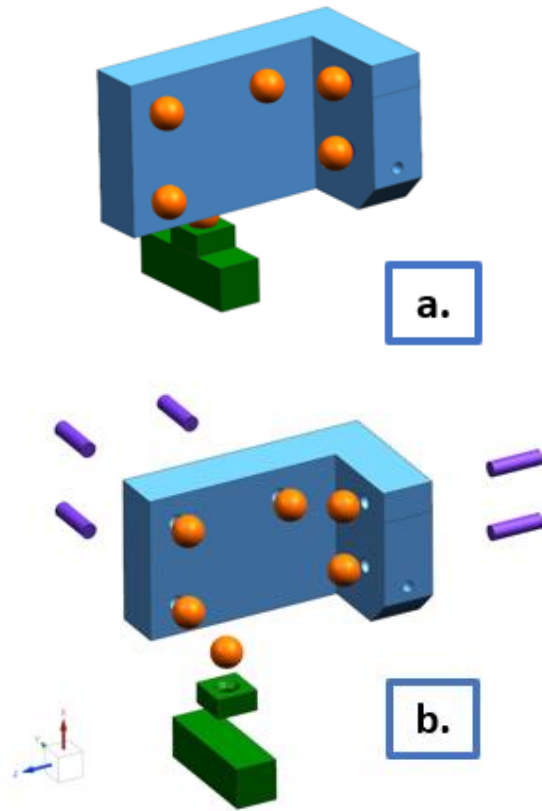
Adapter with steel pins and magnets CAD (NX) (a) assembled view (b) exploded view
